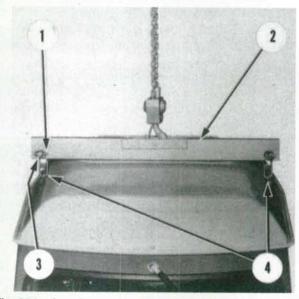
Attach spreader bar (2) to threaded lifting points in top of cab using rings (3) and eyebolts (4).
